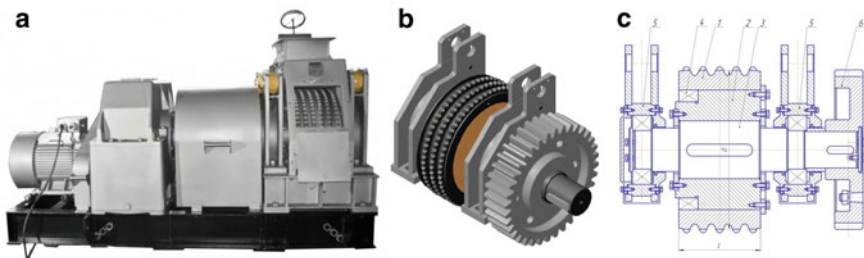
Briquetting roller press: general view (a); design of roll (b); components (c): 1—gear-type replaceable pressing tire; 2—hub; 3—driving shaft; 4—clamping ring; 5—bearing supports; 6—synchronizing gear
